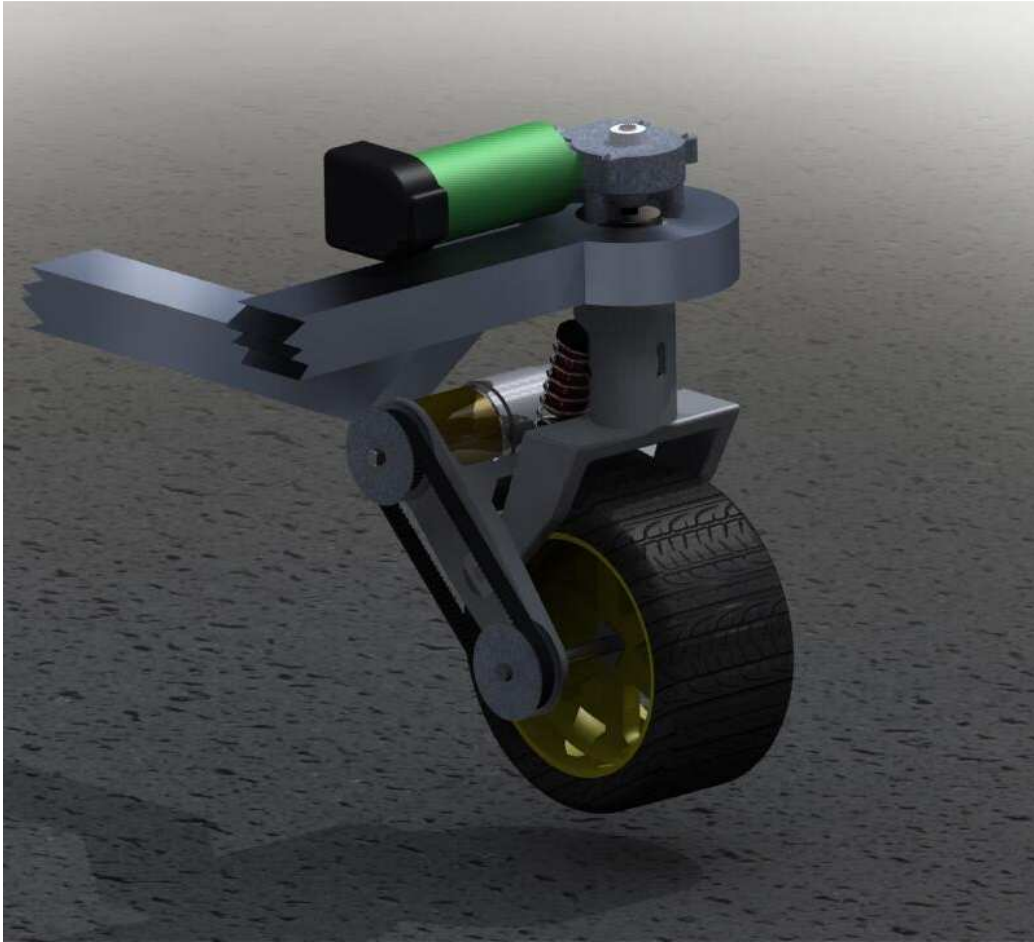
Wheel mount design inspired by baby-coach suspension, with engine placed at the mount leg.
